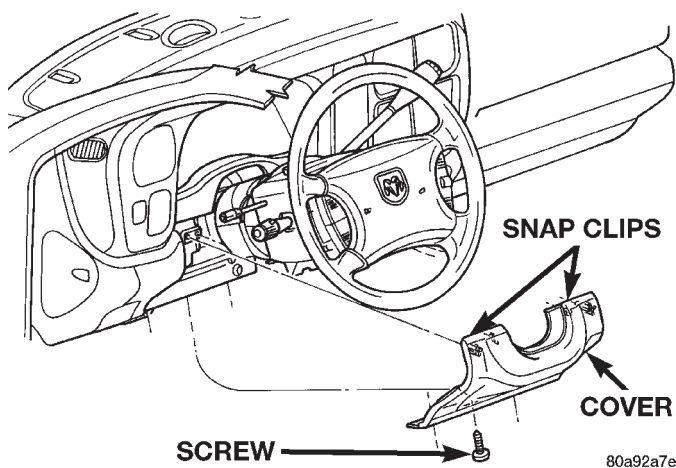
Steering Column Opening Cover and Knee Blocker Remove/Install
